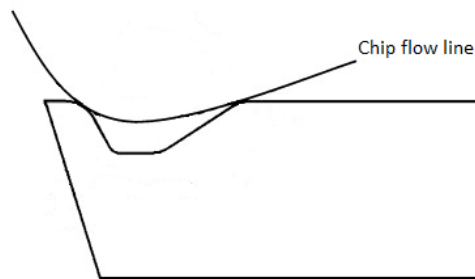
Chip flow line with a chip breaker geometry tool, adapted from [10]
